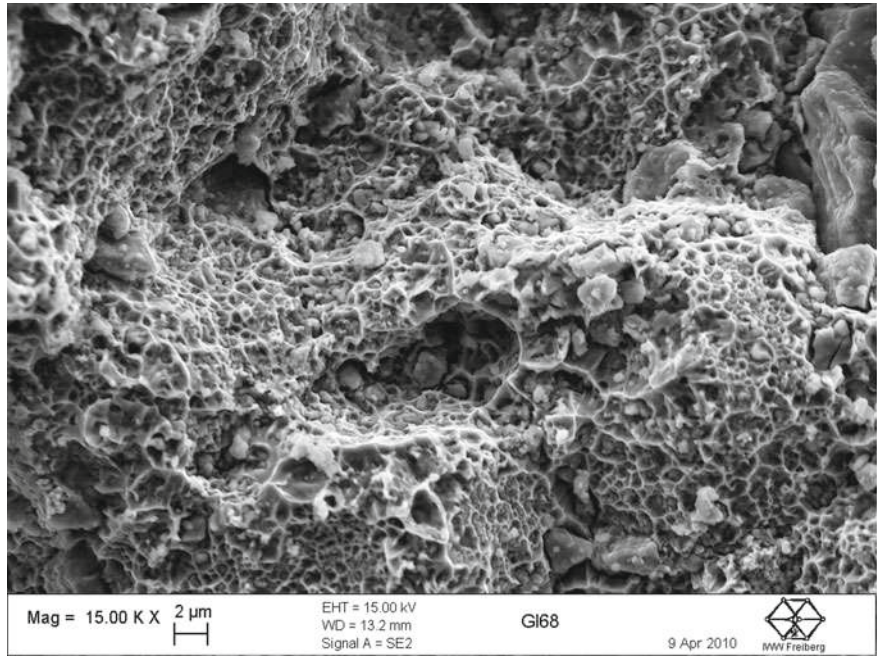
Fracture surface of a composite sample with 5% ZrO₂ sintered at 1100 °C for 11 min
